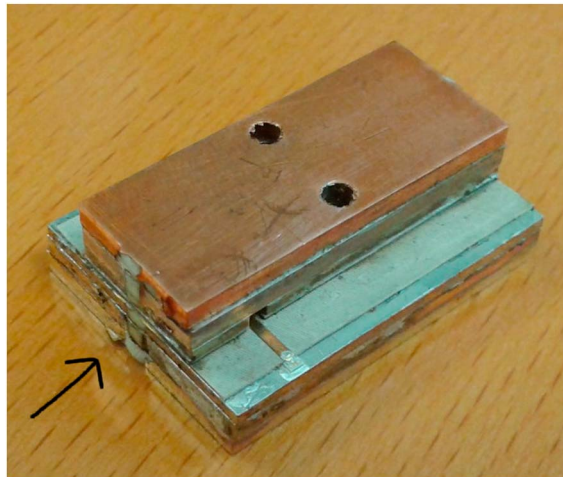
Perspective view of the manufactured back-to-back transition with all the PCB assembled.
